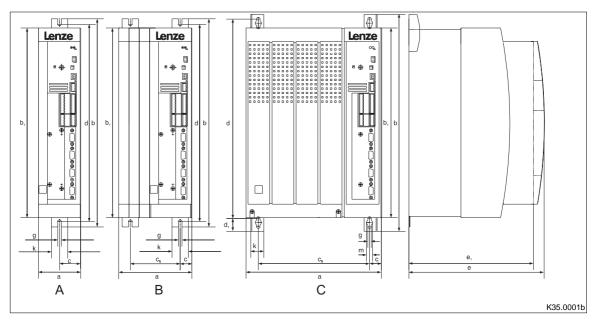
Dimensions for assembly with fixing rails/fixing brackets
